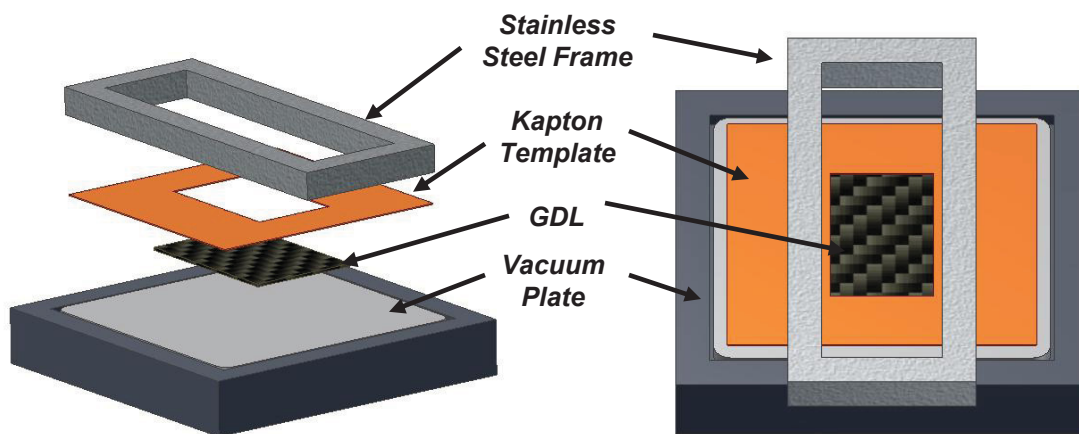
Front (right) and exploded (left) views of the setup used to apply MPLs.
